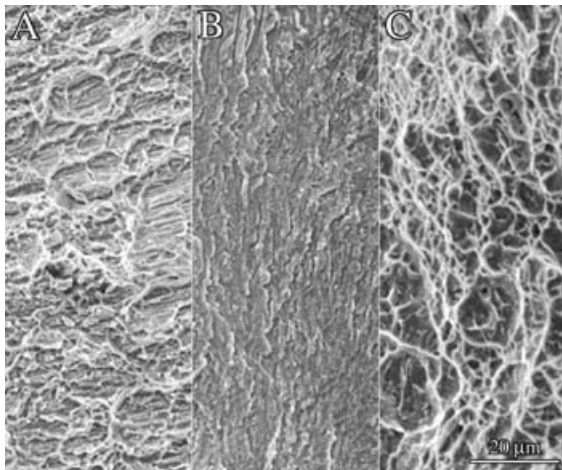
SEM micrographs of the fracture surfaces of Ti-6Al-7Nb specimens. (A) laser welded with argon shielding; (B) laser welded without argon shielding; (C) control.
